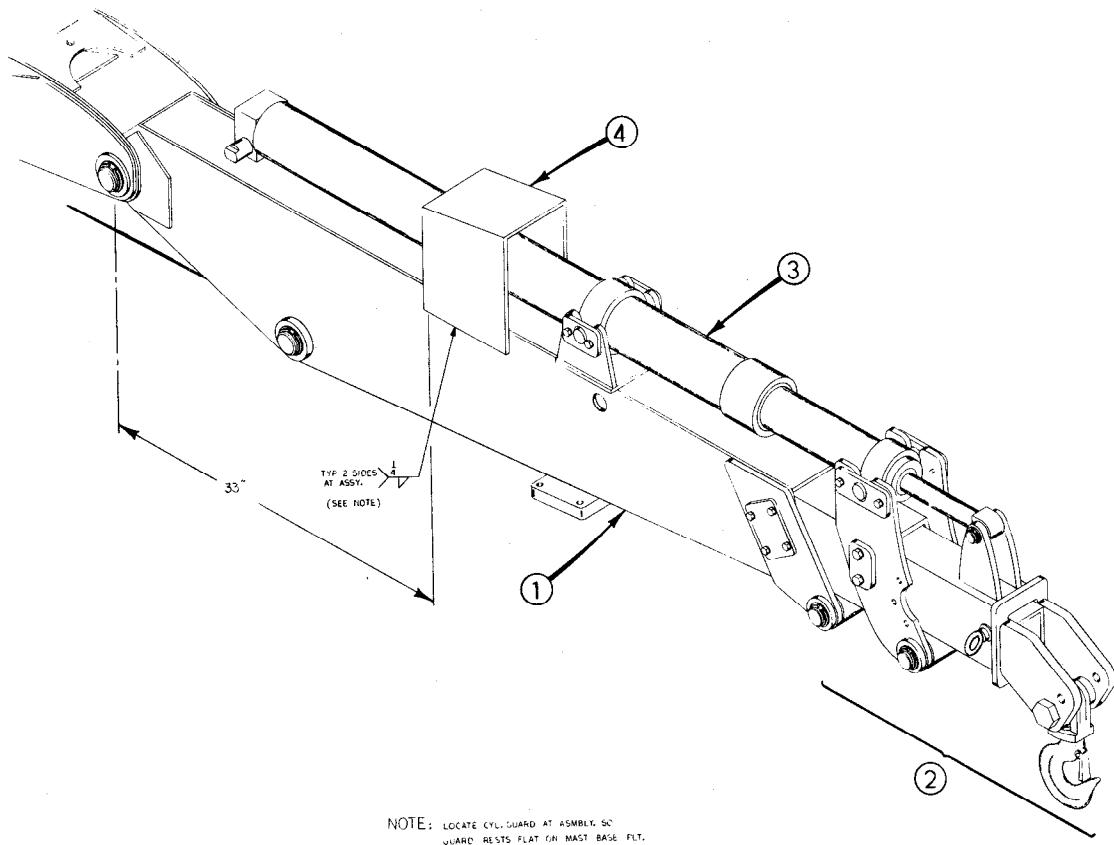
Secondary and Extension Boom - 2-Stage Hydraulic, 1-Stage Manual Extension with Winch (Part Number 41702816)
